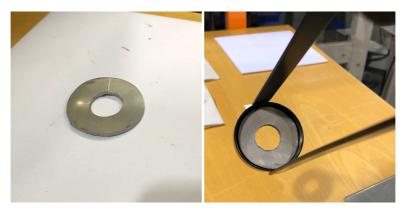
Flat metal ring solution to the caulking gun design flaw.
